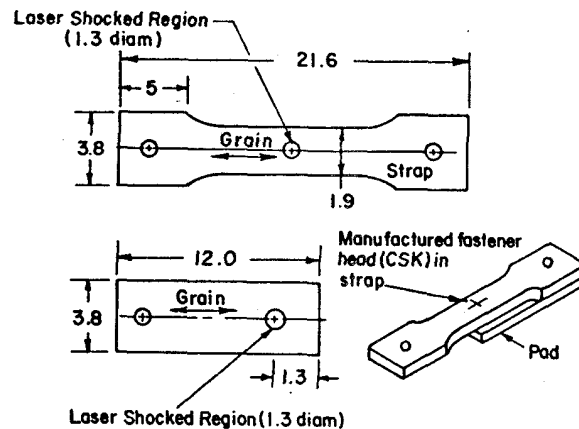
Geometry of the Fretting Fatigue Specimen. The Dimensions are Given in Centimeters.
